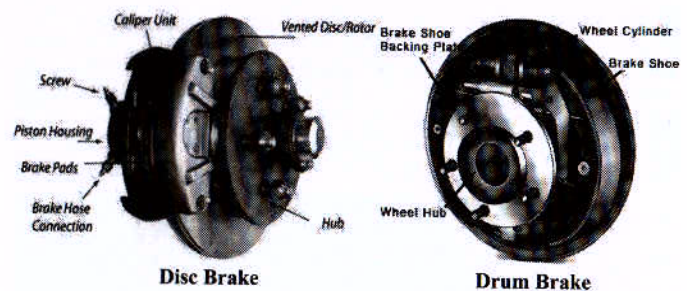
Disc Brake and Drum Brake assembly used in automobiles
